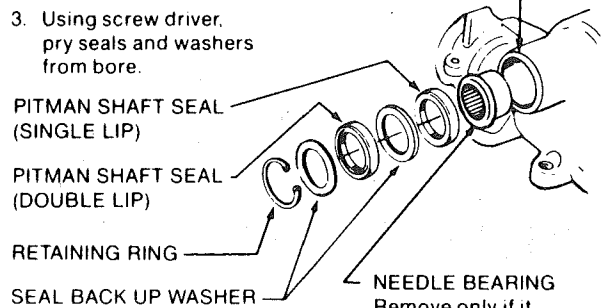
B7-16 Overhaul 800/808 Gear, Chart E
